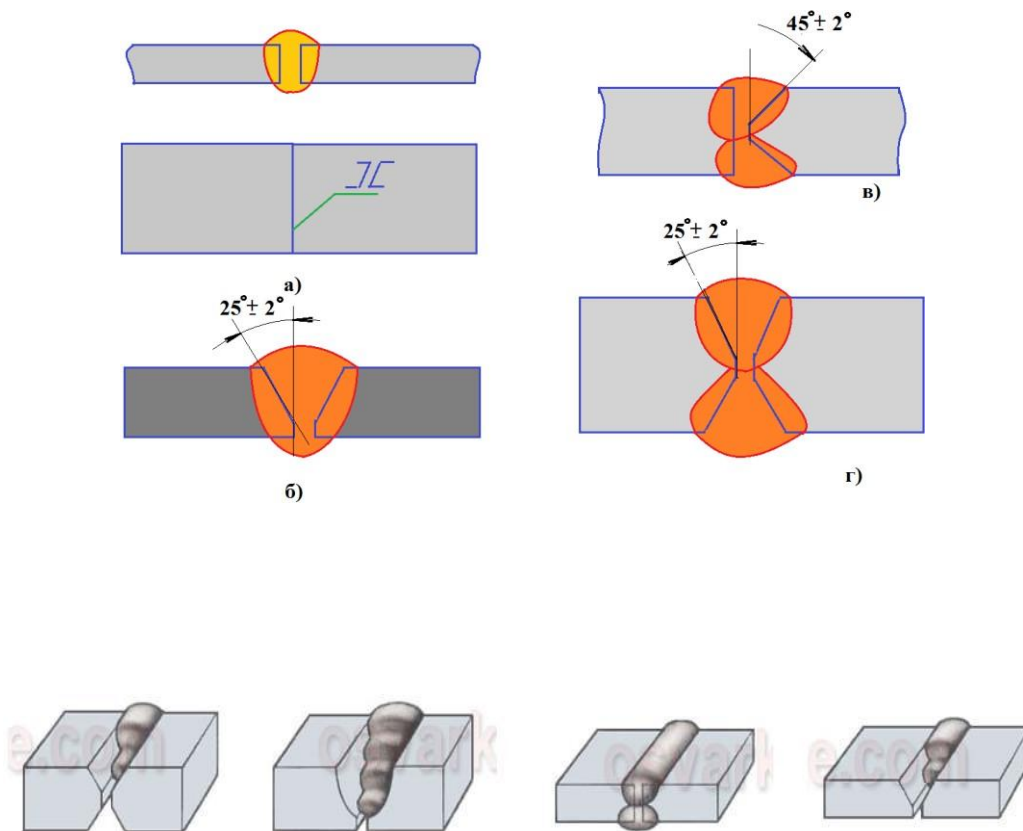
The thickness of the details in the joint with a triple weld: a) - up to 8 mm; b) – up to 26 mm; c) – up to 40 mm; g)- Forms of welding joints up to 60 mm.
